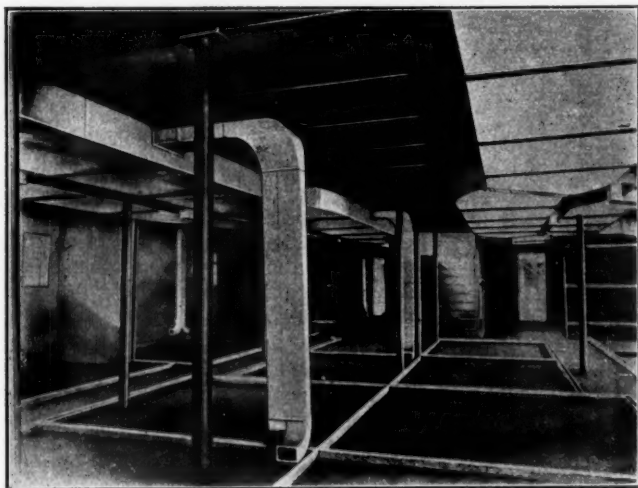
CONSTRUCTION VIEW SHOWING INSTALLATION OF DUCT WORK FOR VENTILATING STEAMSHIPS ST. LOUIS AND ST. PAUL
